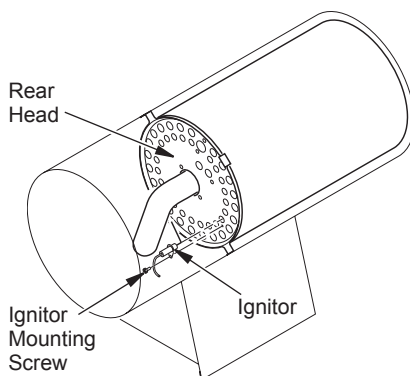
Removing Ignitor Mounting Screw and Ignitor
